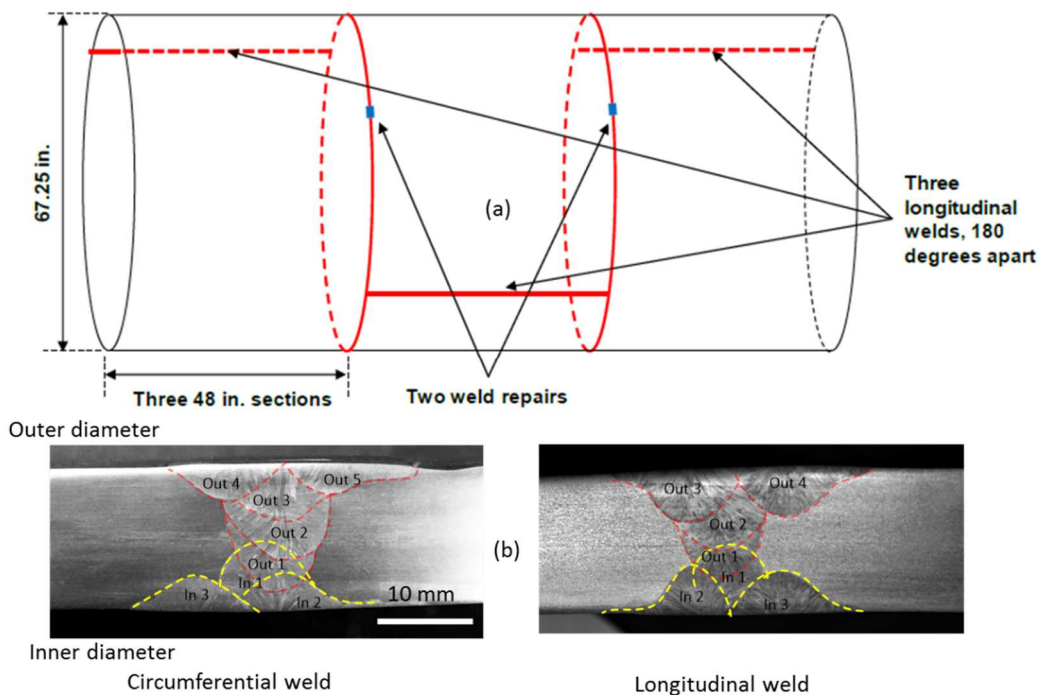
(a) Schematic drawing of the mockup and (b) the corresponding weld bead morphology for each pass
